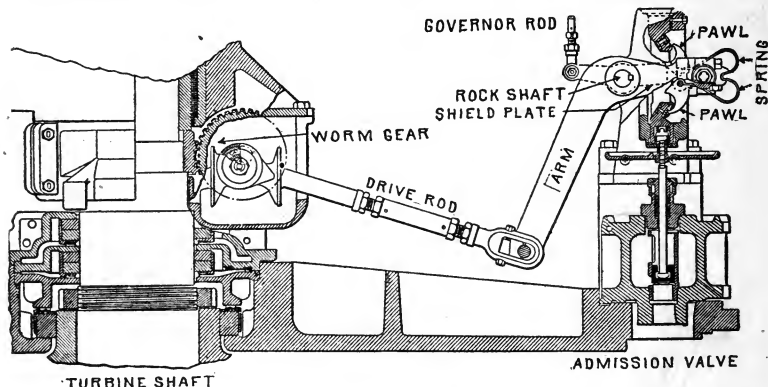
Curtis mechanical valve gear. The admission valves are located in steam chests directly over the first stage nozzles. The valve stems extend upward through stuffing boxes and are attached to notched cross heads. Each cross head is operated by a pair of reciprocating pawls, or dogs, one for opening, one for closing the valve. The several pairs of pawls are hung on a common shaft, which receives a rocking motion from a crank, driven from a worm and worm wheel by the turbine shaft. The pawls engage in notches in the side of the cross heads to open or close the valves, the engagement being effected by *shield plates* under control of the governor. These plates are set one a little ahead of the other, to obtain successive opening or closing of the valves. When more steam is required the shield plate allows the proper pawl to fall into its notch in the cross head and lift the valve from its seat. If less steam be wanted, the shield plate rises and allows the lower pawl to close the valve on the down stroke. The valve is held either open or shut by the steam pressure till it is moved by the pawl on the rock shaft. The amount of travel on the rock shaft is fixed by the design, but the proportionate travel above and below the horizontal is controlled by the length of the connecting rods from the crank to the rock shaft.
